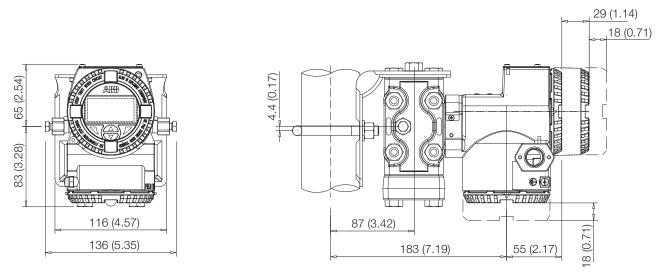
Differential Pressure Style transmitter with barrel housing and Kynar inserts installed on a horizontal pipe with optional bracket (B2)
